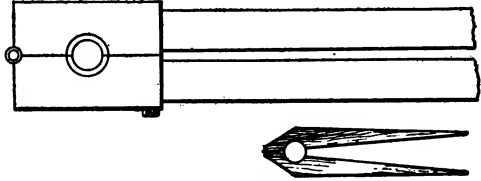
Lapping Fixture of Simple Construction for Crankshaft Pins
